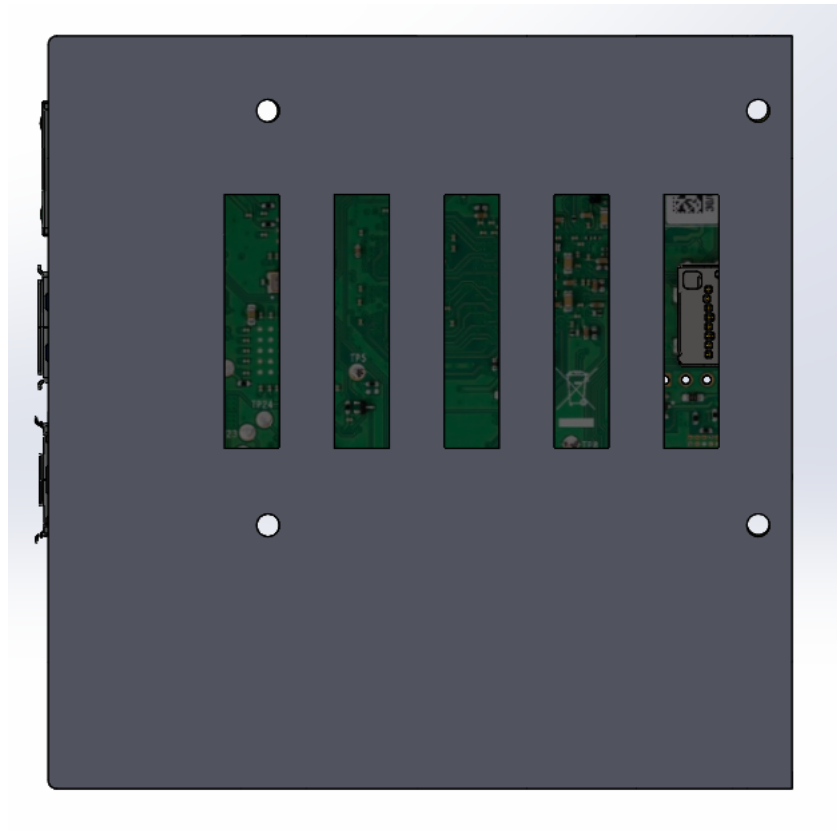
Bottom view with 4 mounting holes and ventilation slits in between the mounting holes.
